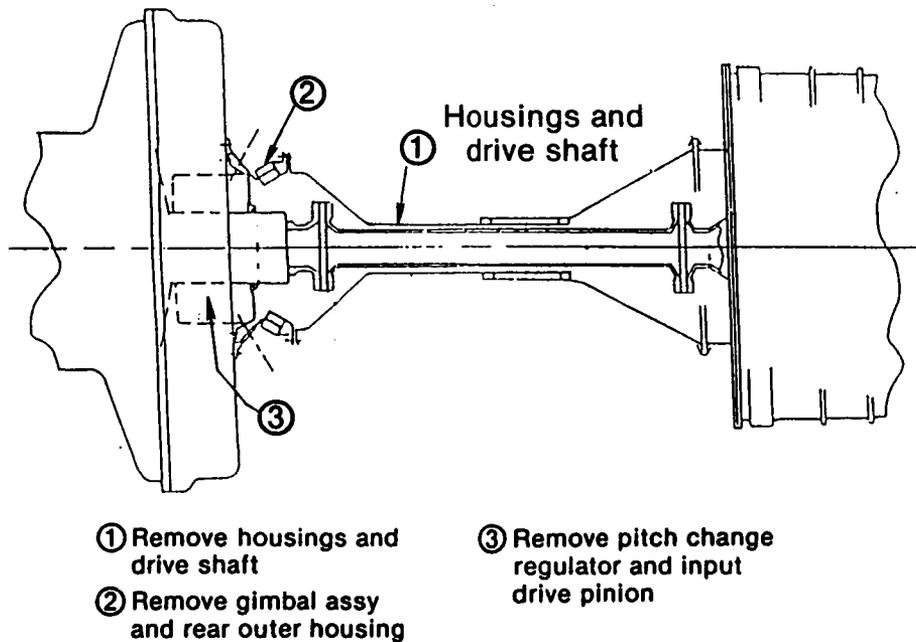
Pitch Change Regulator Removal - Since the gearbox must be removed, the average time to remove and replace the pitch change regulator is also 180 minutes. (J27638-24)
